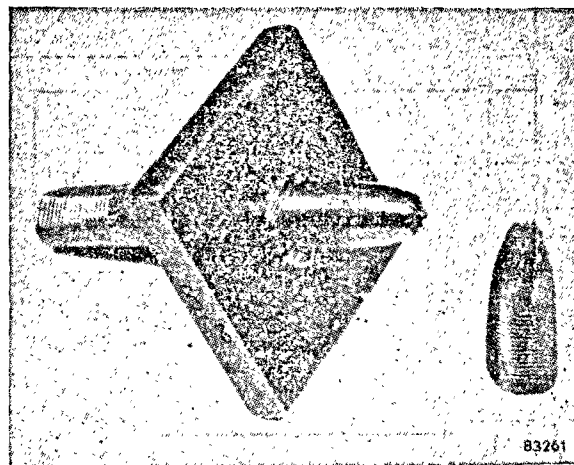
a. Result of a tensile test on two studs welded end to end to opposite sides of a plate.
